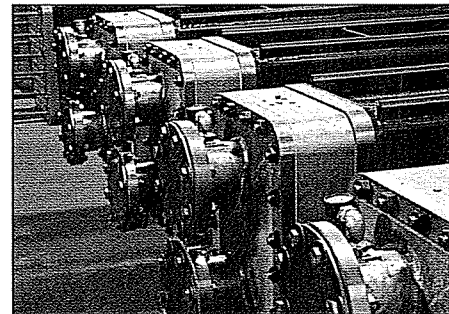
Replacement inlet/outlet cover installed on hydrogen cooler
